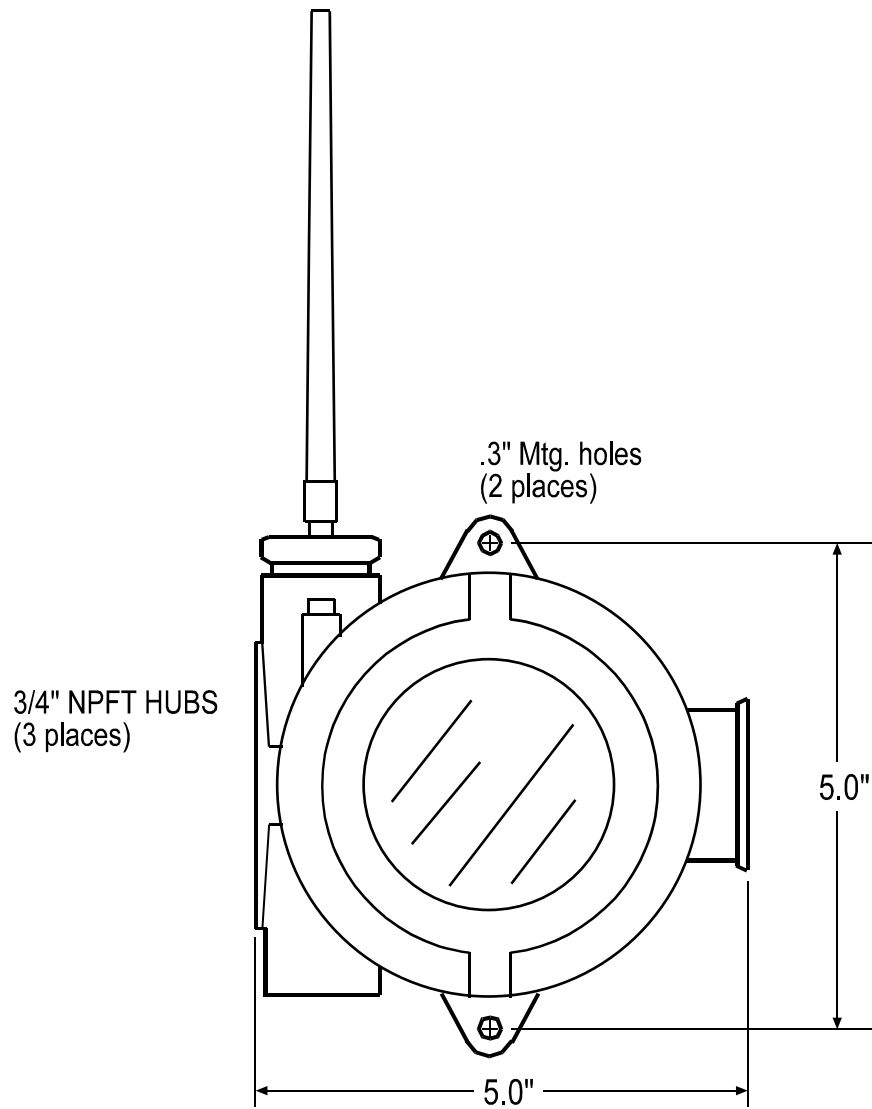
SenSmart 7000 NEMA 7 Explosion-Proof Enclosure
